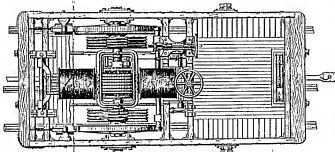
PLAN VIEW OF THE ELECTRIC MOTOR.
